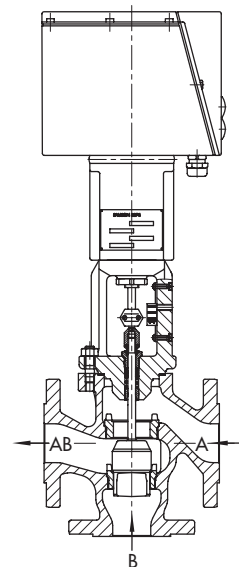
· Type 3244/3274 Electric Control Valve with Type 3274 Electric Actuator and Type 3244 Three-way Valve for mixing service
